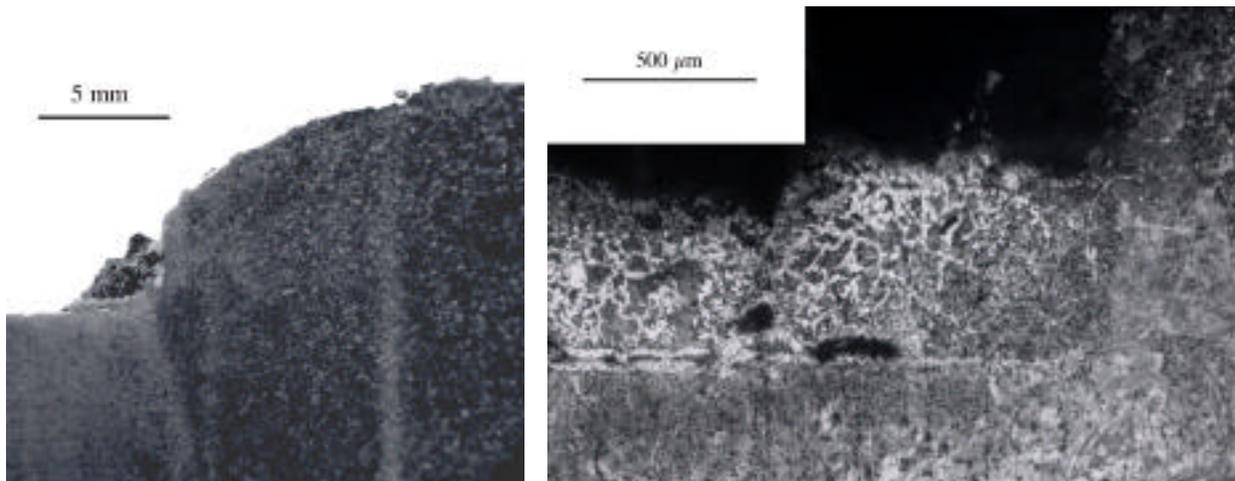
Weld toe at base-to-web fillet of a normal thermite weld. Left: lower magnification macro-photograph. Right: higher magnification view showing apex of cold lap
